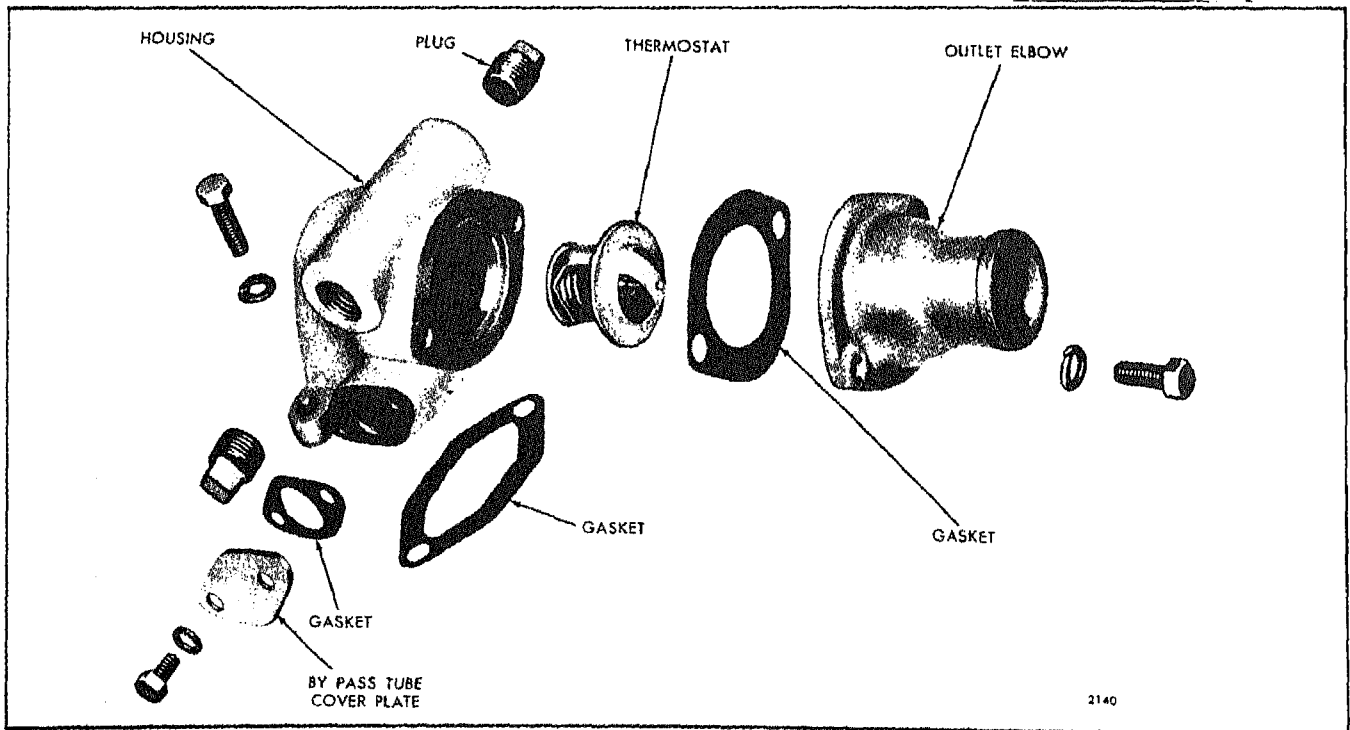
Thermostat Housing Details and Relative Location of Parts (In-Line Engine)
